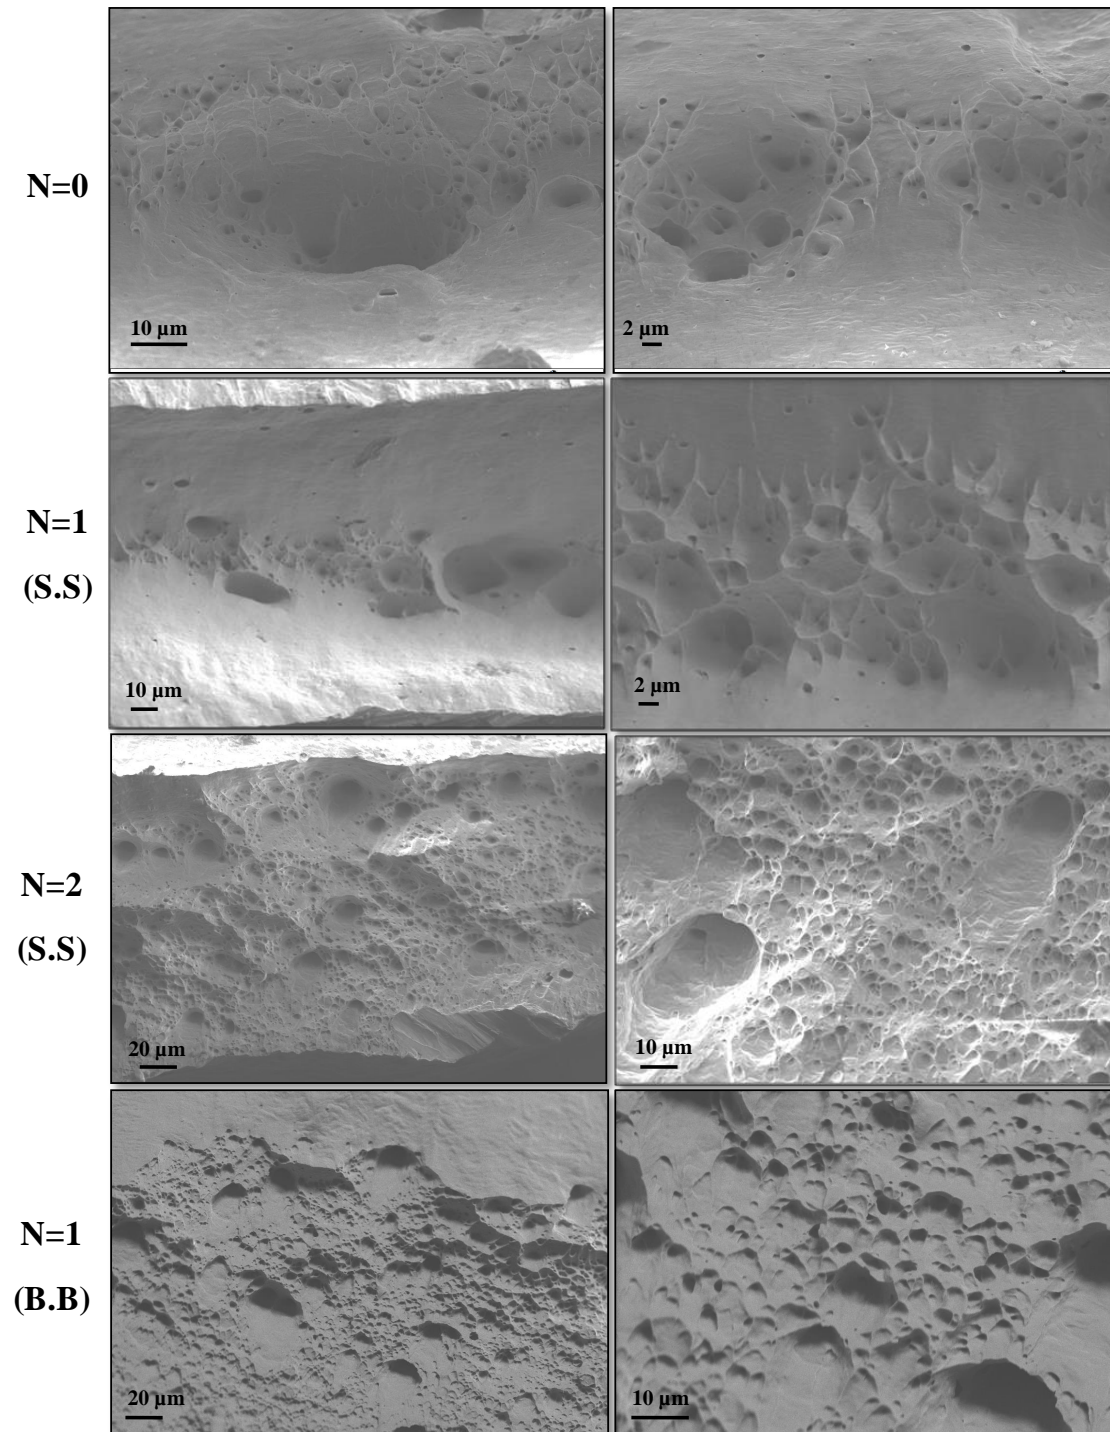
Fracture surfaces morphologies of the Fe-48% Ni alloy before and after ECAP.
